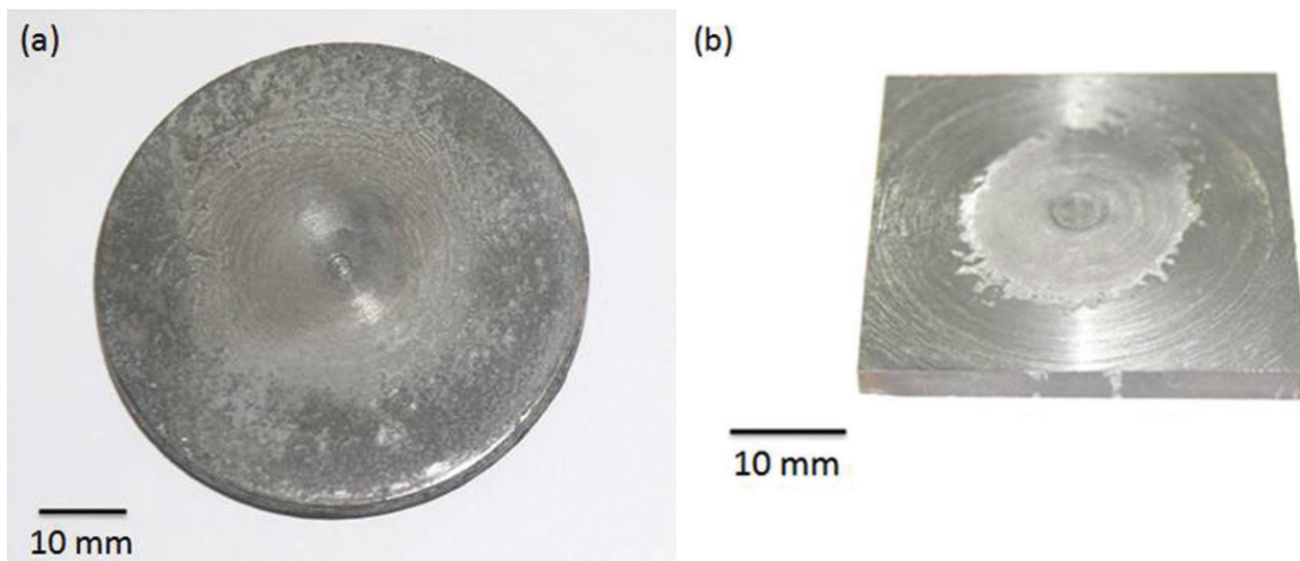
Tungsten plates; (a) as hot-pressed, and (b) machined after EDM cutting
